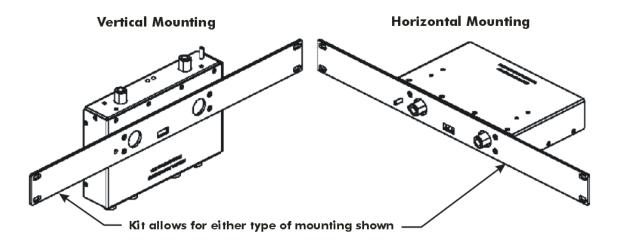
KT/10254 Mounting Panel Kit (for horizontal or vertical mounting)
